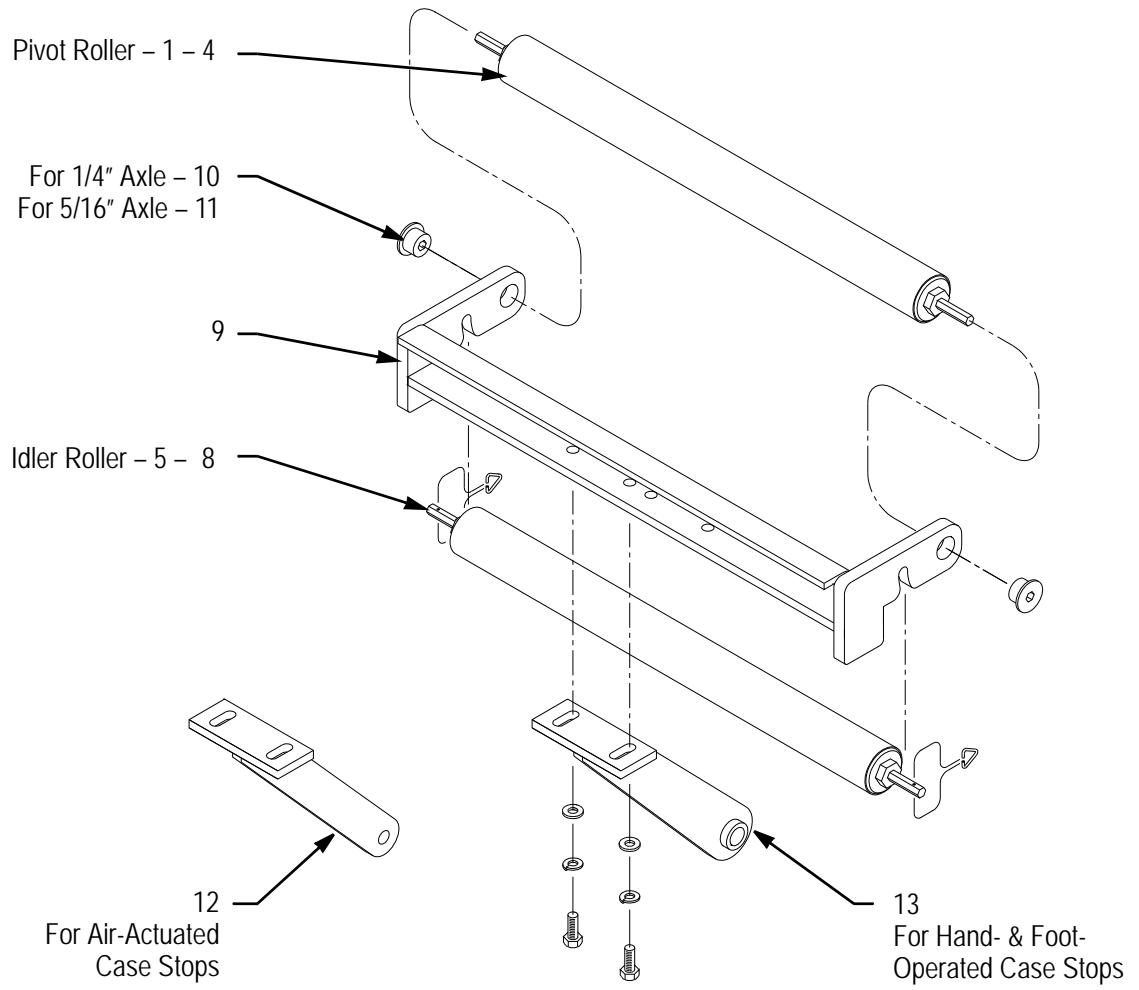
Pivot Assembly - 1 1/2" & 3" Roller Centers
